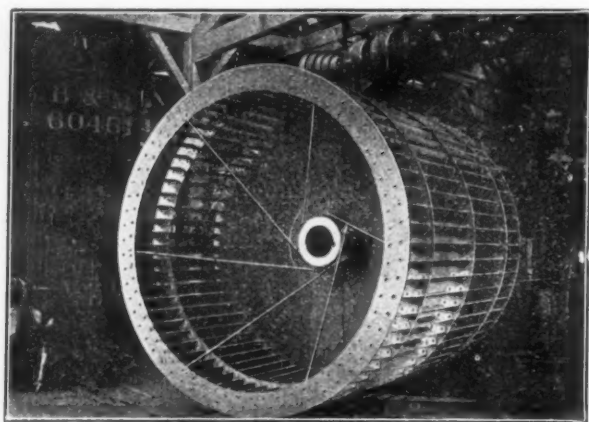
SIROCCO FAN FOR TUNNEL VENTILATION.
